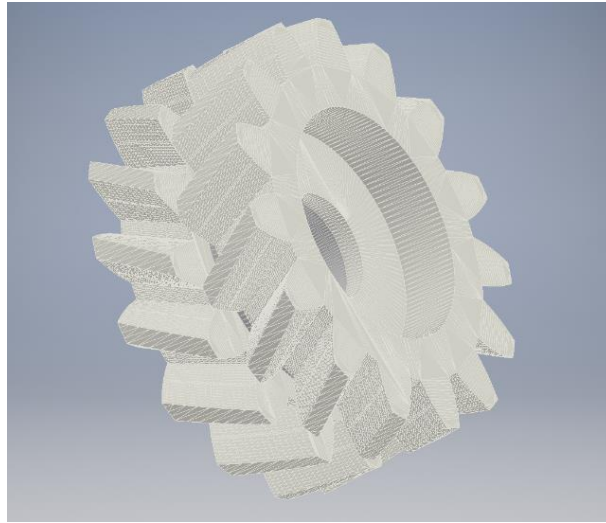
Wuest type herring bone idler pulley designed in CAD
